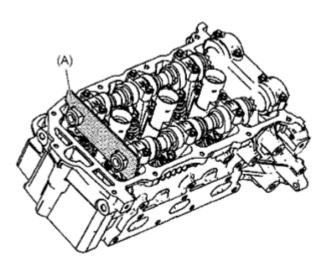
Holding Camshafts (Bank 1) With Special Tool Courtesy of SUZUKI OF AMERICA CORP.
